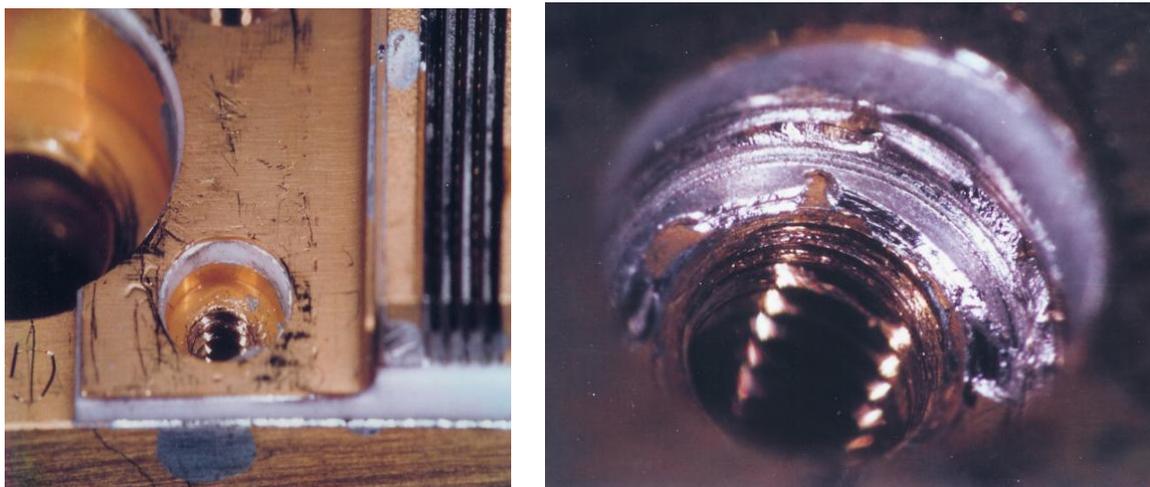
a) Indium creep into bolt hole of package that caused device shorting, b) high magnification of bolt hole.
